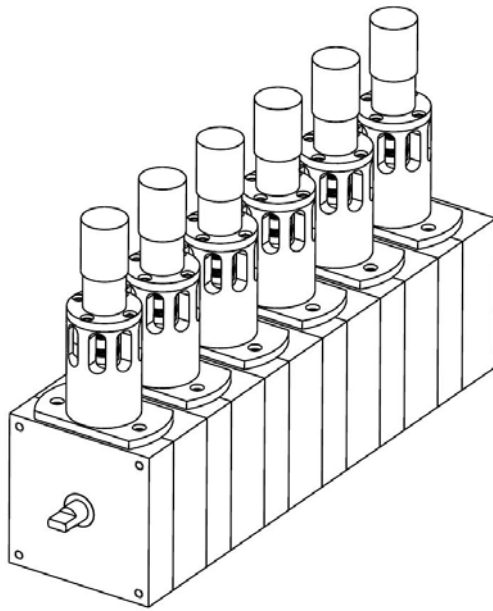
Stack of six variable displacement vane pumps for actuation of a six-axis machine.
